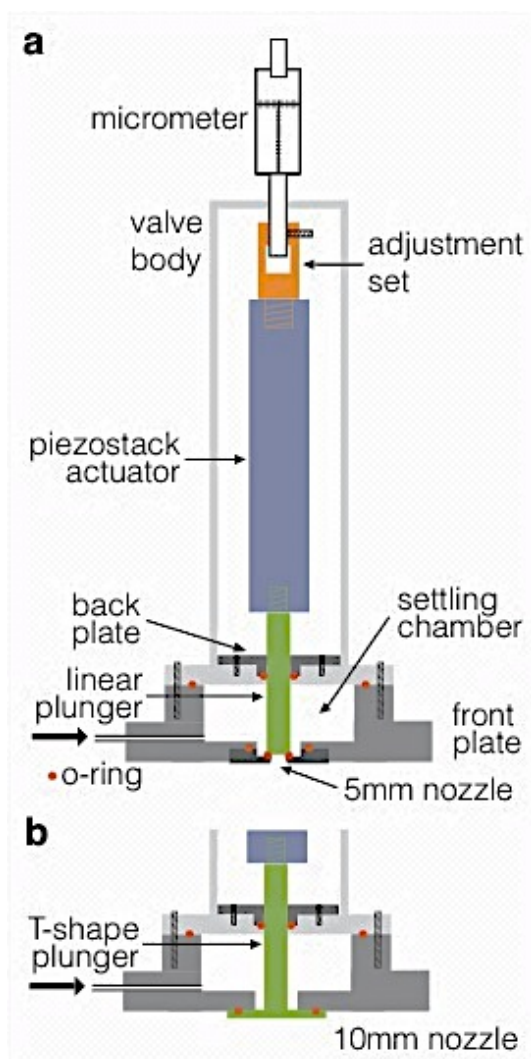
Cut-away view of the valve assembly. The piezostack actuator (blue) is mounted in a stainless steel valve body (light grey). The position of the plunger (green), either linear (a) or T-shaped (b), is adjusted by a micrometer. The different o-ring positions are symbolized by red circles. In particular, the plunger is sealed at two positions, i.e. by an o-ring at the nozzle itself, and by another o-ring fixed at the top of the plunger, with its tightness adjusted by varying the pressure exerted by the back plate.
